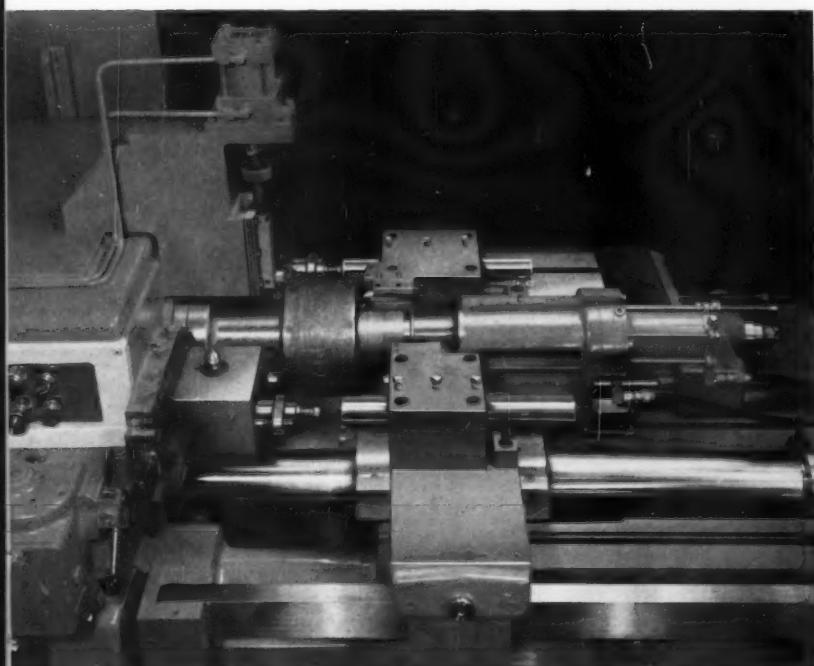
Roughing and finishing of rabbets on electric motor frames are accomplished in one setup on this automatic lathe. Both ends of the frame are machined simultaneously.
